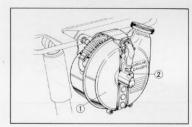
(1) Fuel sub tank (2) Helmet holder
